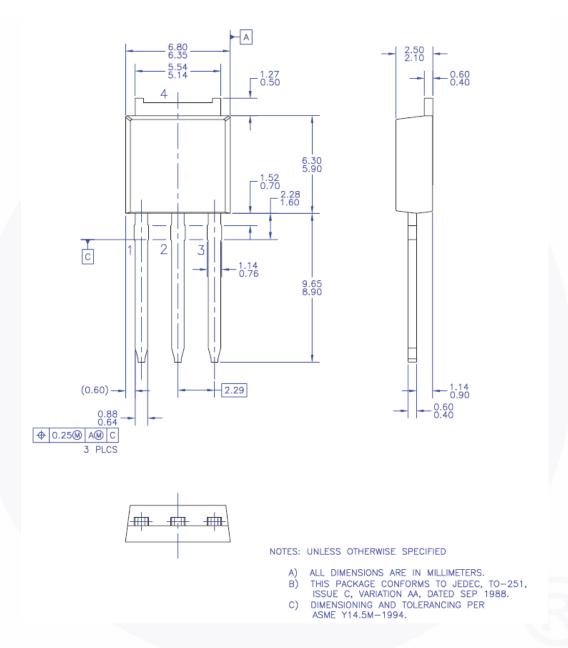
TO251 (I-PAK), Molded, 3-Lead
